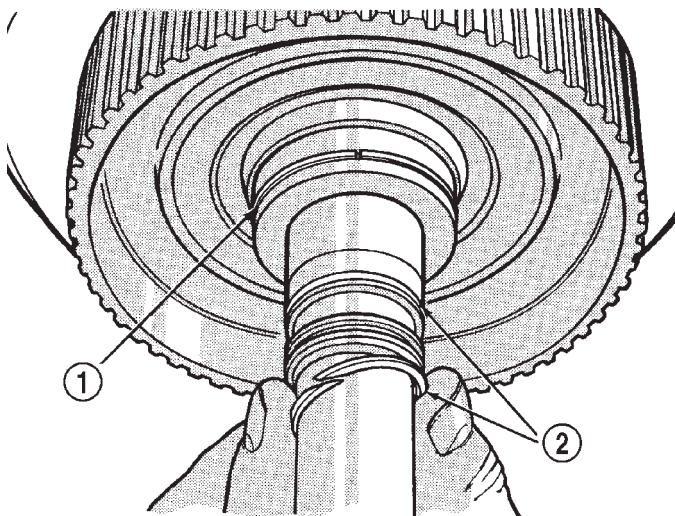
Rear Clutch Retainer And Input Shaft Seal Ring Installation
